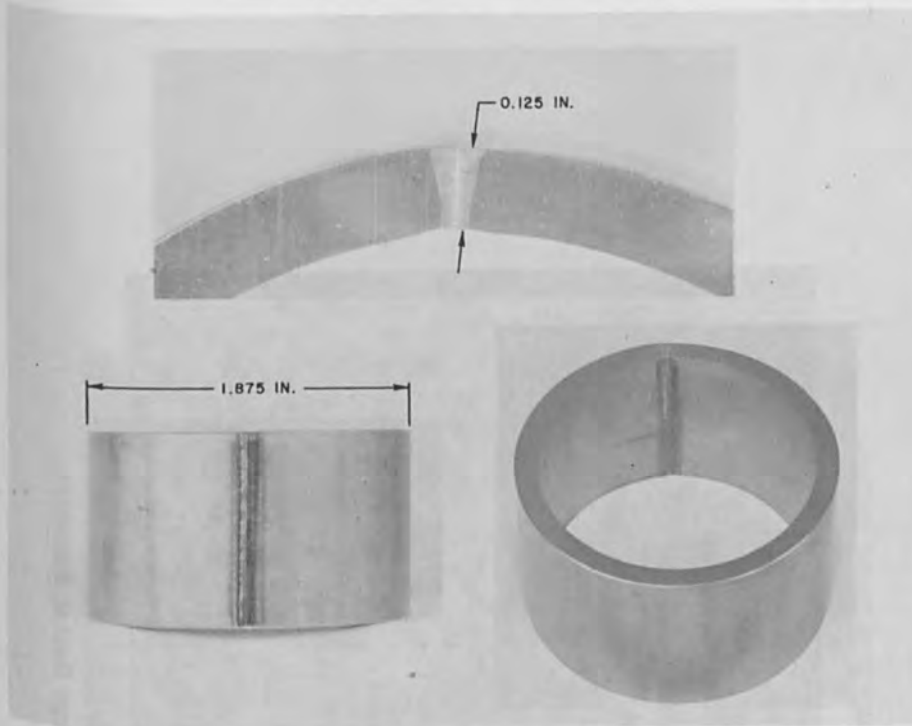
Nonvacuum Electron Beam Welded Pipe.
